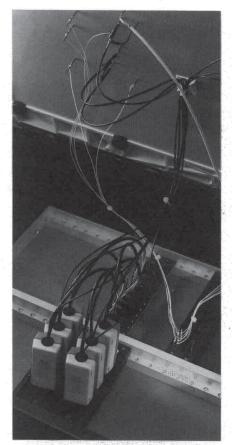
Tektronix P6513 and P6517 Spring Contact Probes installed in a test fixture.
